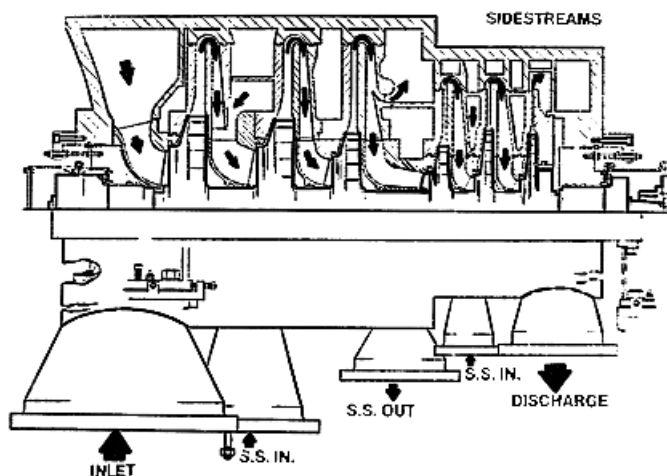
Cross-sectional view of a sidestream compressor. (*Dresser-Rand Company, Olean, N.Y.*)
